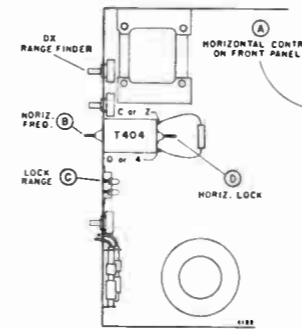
Bottom View of Chassis Showing Horizontal Sync Adjustments.
